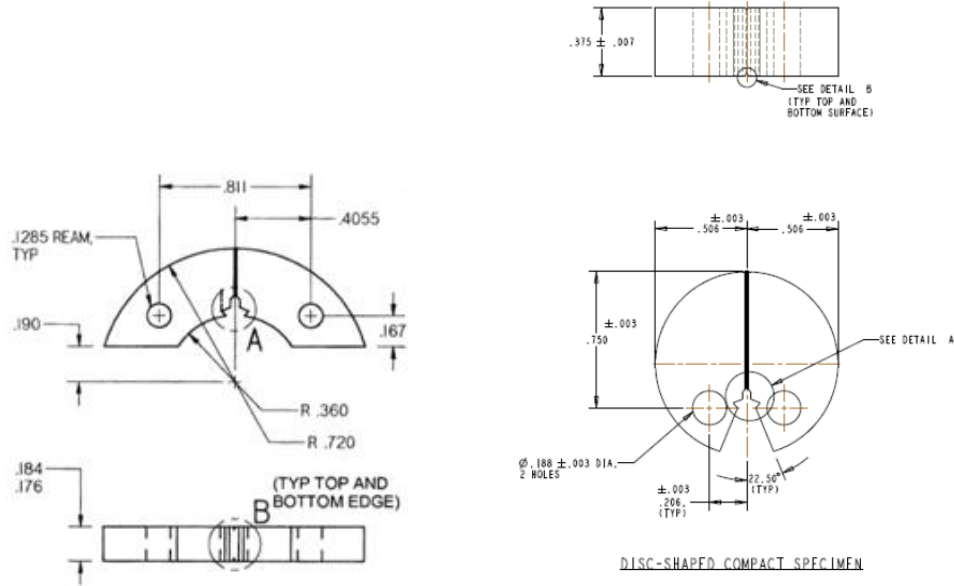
Fracture Toughness Specimens: (a) Arc-Shaped; and, (b) Disk-Shaped. Dimensions are in Inches.
